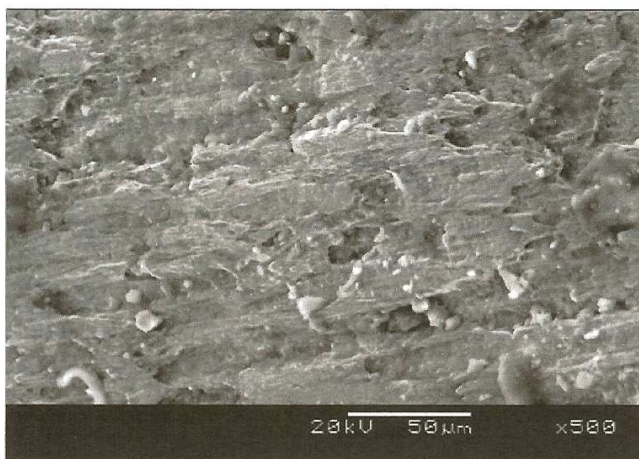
Fracture surface area A showing shear type failure geometry (x500, SEM)
